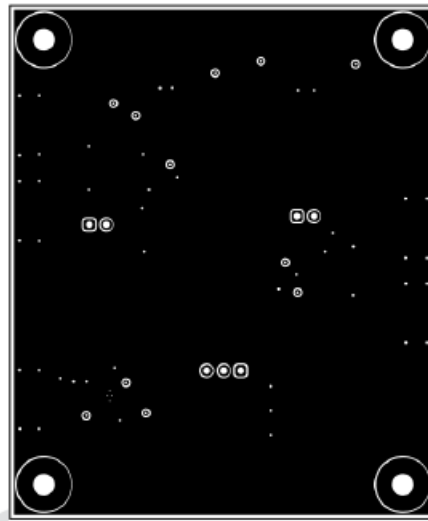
PCB Layout Example From LMK6 EVM - GND Layer 1
